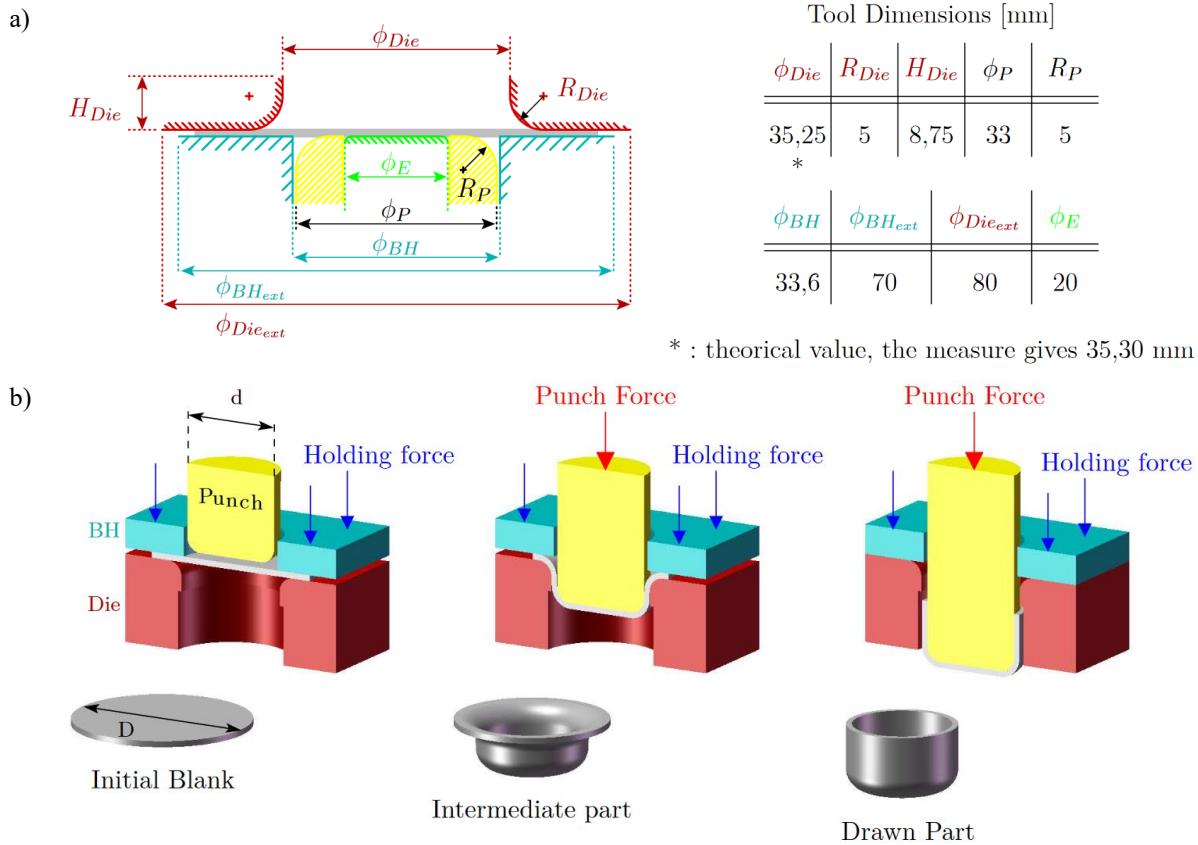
a) Basic diagram of the Swift cup drawing test and b) tools dimensions used for the Swift cup drawing tests [10].
